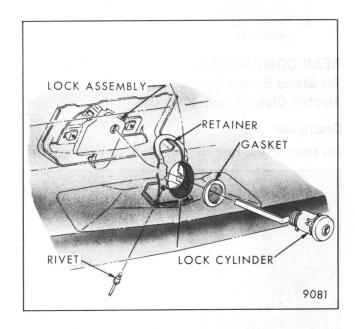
Typical Bottom Loading Lock Cylinder Retainer
